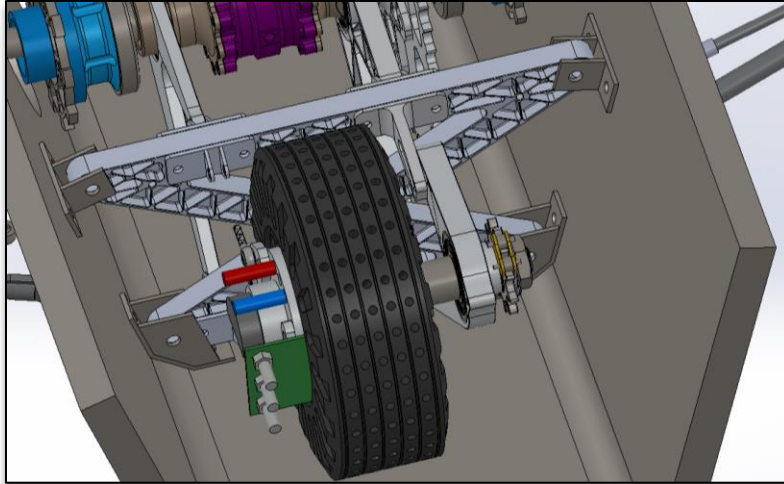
Drivetrain and Support Plate Shown in Place in Rear of Car
